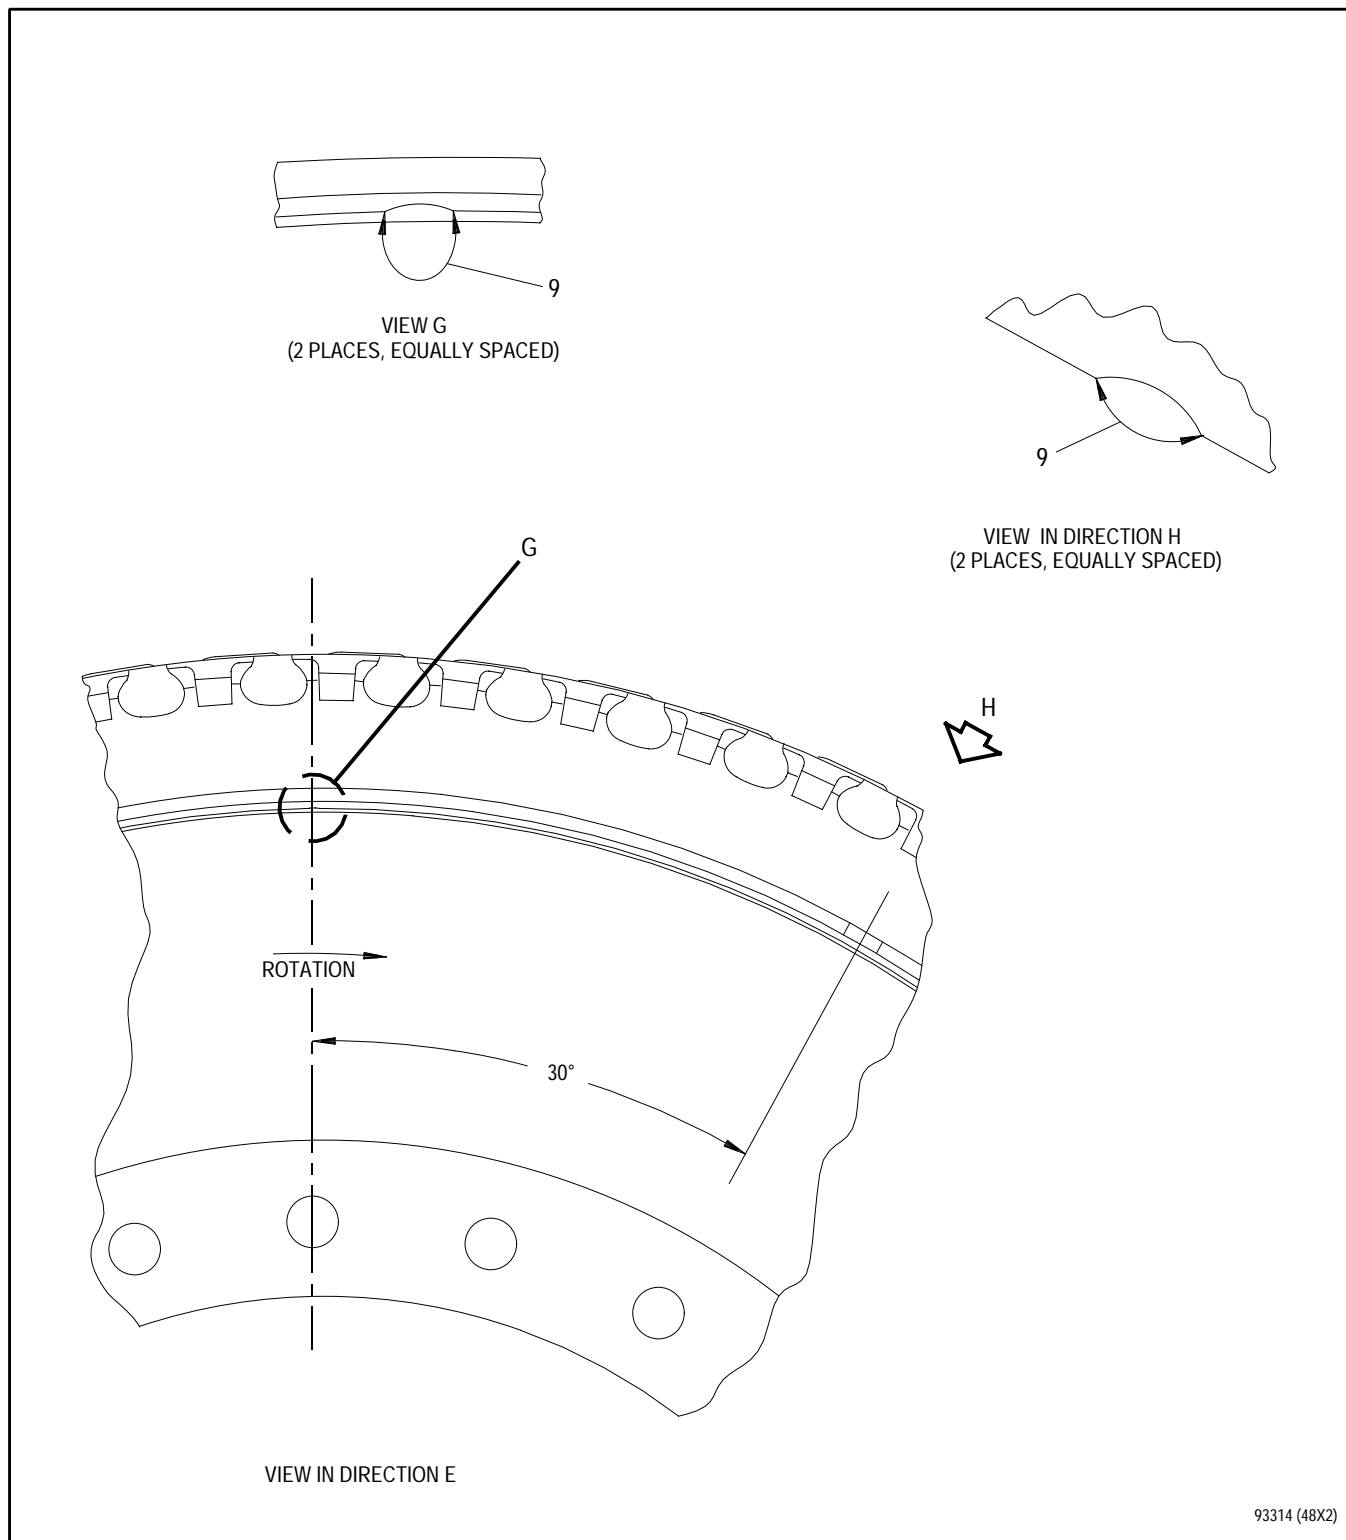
Rear Compressor Front Disk-Drum Rotor Assembly - Snap Diameter Plasma Coat Repair
